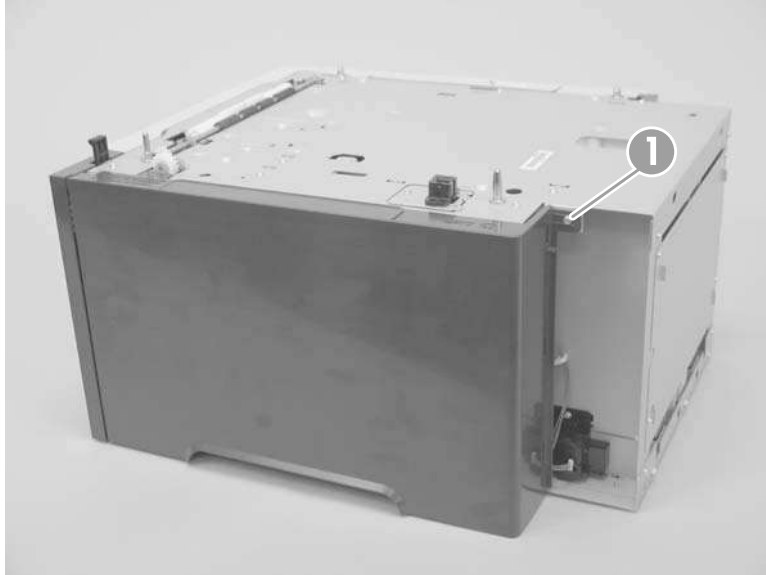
Remove the 1,500-sheet feeder rear cover (2 of 2)
